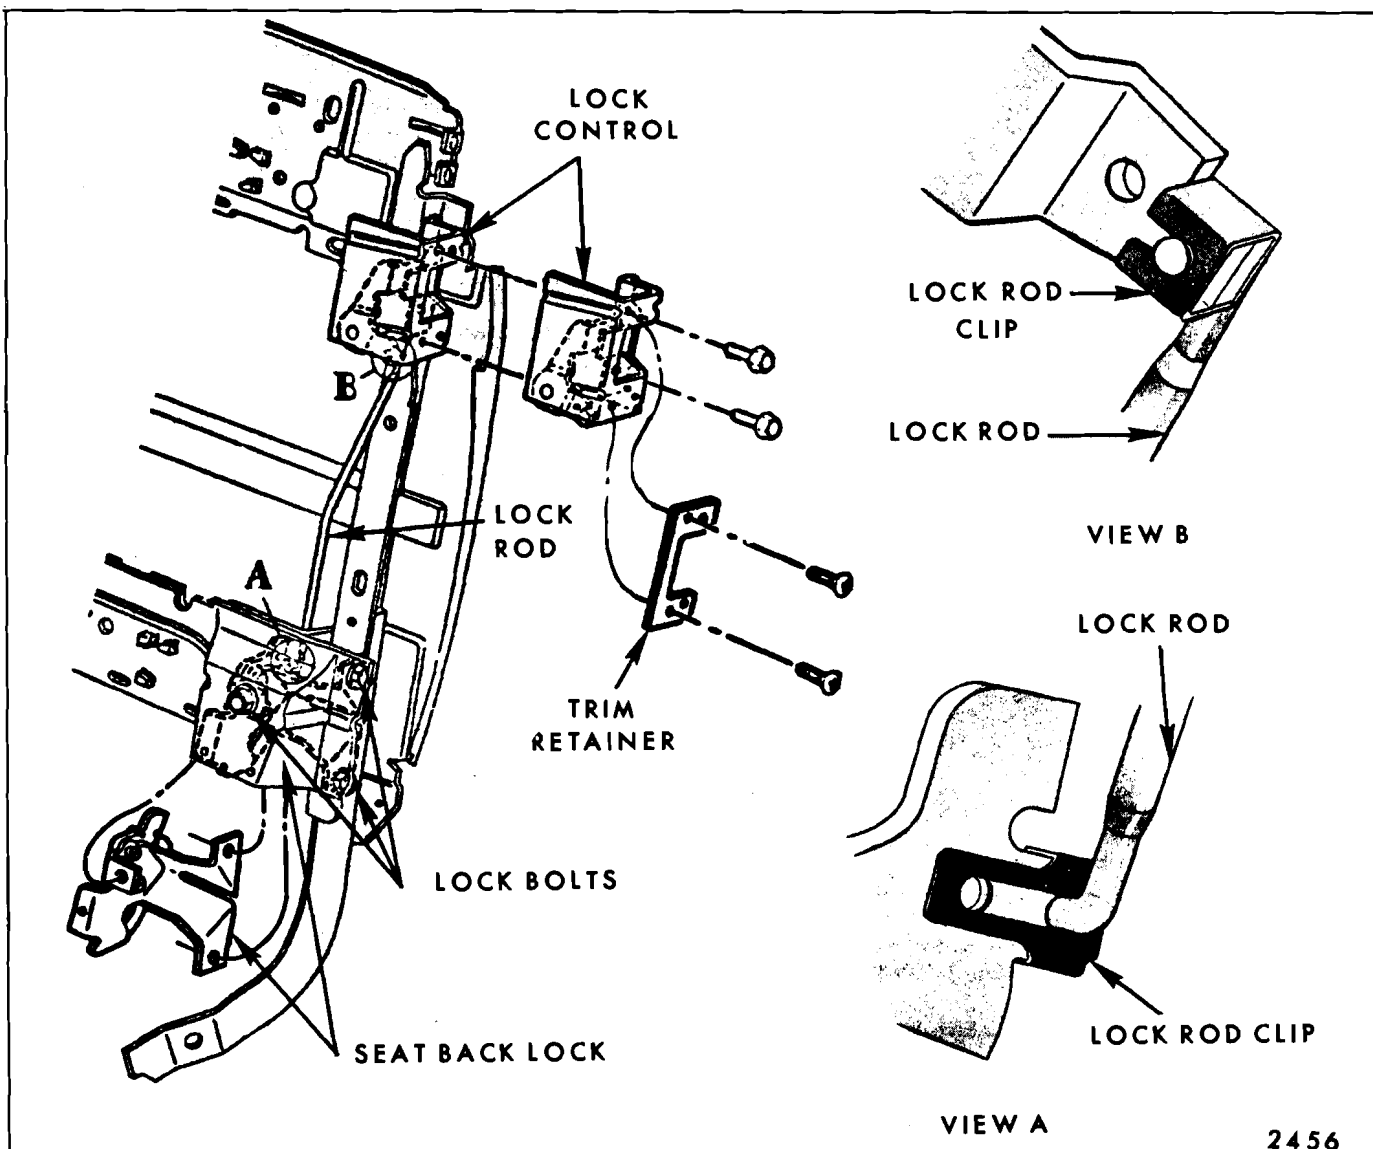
Front Seat Back Lock - "C & E" Styles with Standard Full Width or 60-40 Seats
